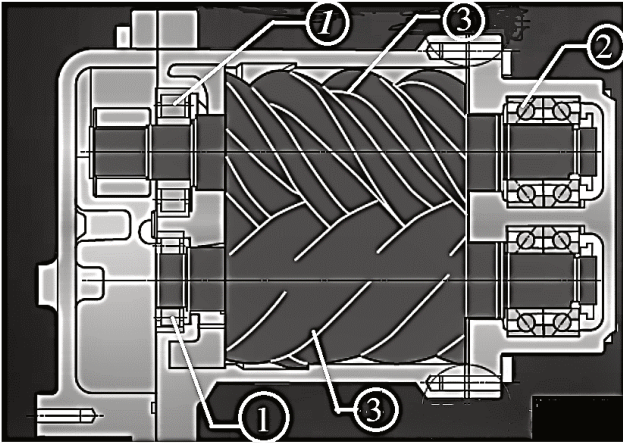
Cylindrical roller bearings in screw compressors (1. Cylindrical roller bearing, 2. Ball bearing, 3. Spiral roller)
